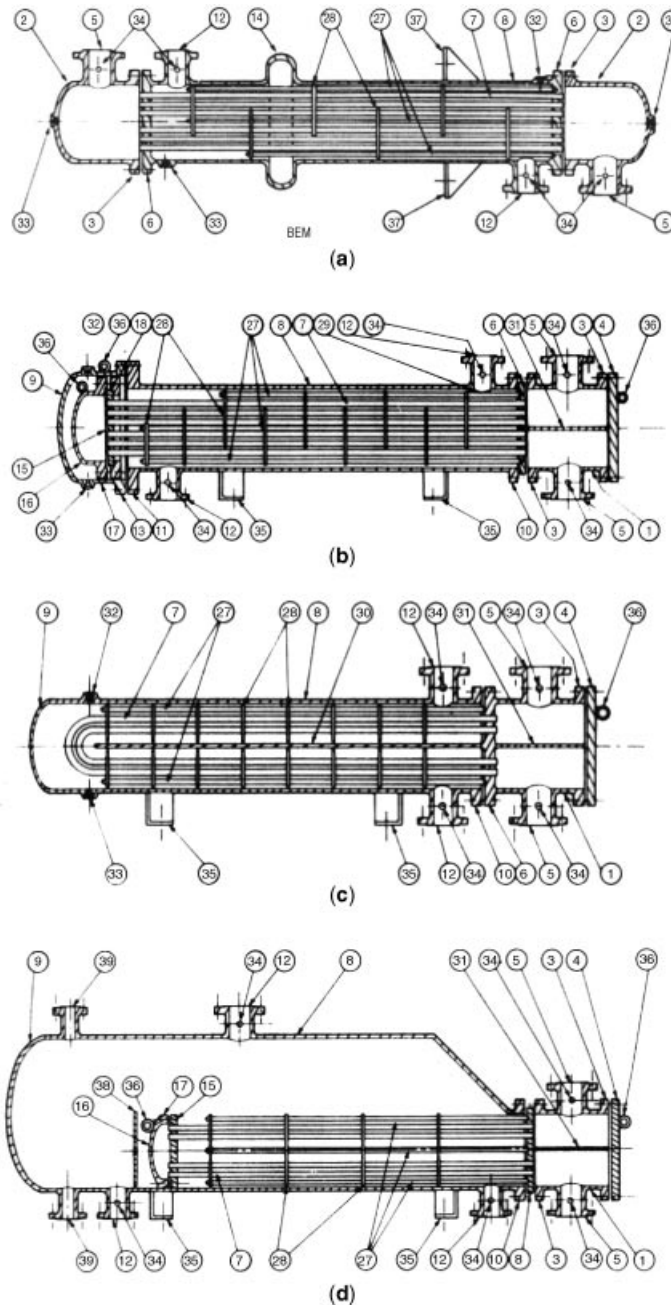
(a) Shell-and-tube heat exchangers, one shell pass and one tube pass. (b) Shell-and-tube heat exchanger, one shell pass and two tube passes, mixing between the tube passes. (From TEMA-Tubular Exchanger Manufacturer Association.) (c) Shell-and-tube heat exchangers, one shell pass and two tube passes, without mixing between the tube passes. (d) Shell-and-tube heat exchanger, Kettle-reboiler.
